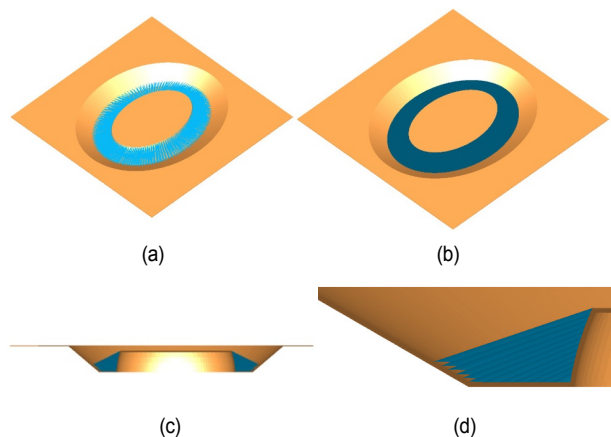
Optimized multidirectional sheet posture: (a) multidirectional radial line; (b) multidirectional sheet posture; (c) section view; (d) local enlarged view.
